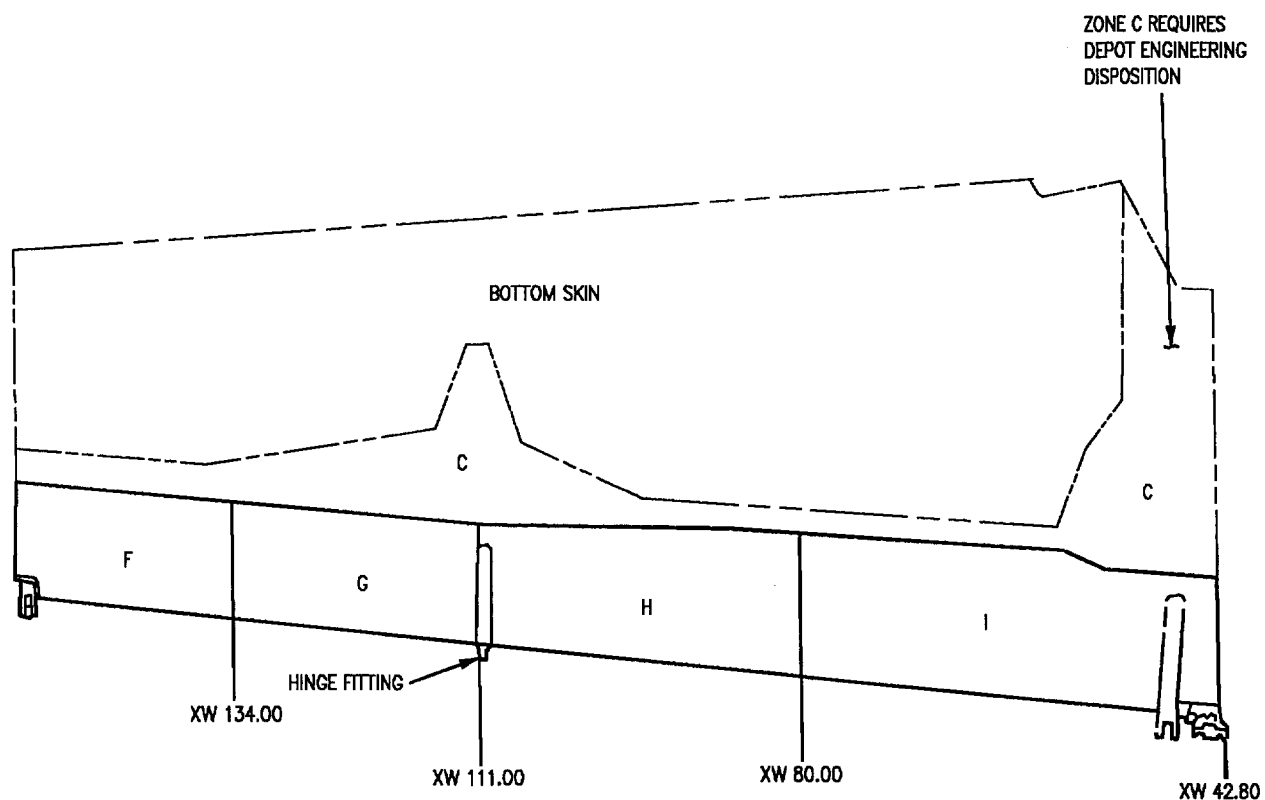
Inboard and Outboard Drive Hinge Skin Replacement (Sheet 1)
